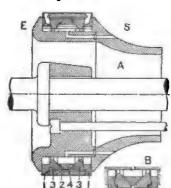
American Balance-Valve Company's Semi-plug Piston-valve.
